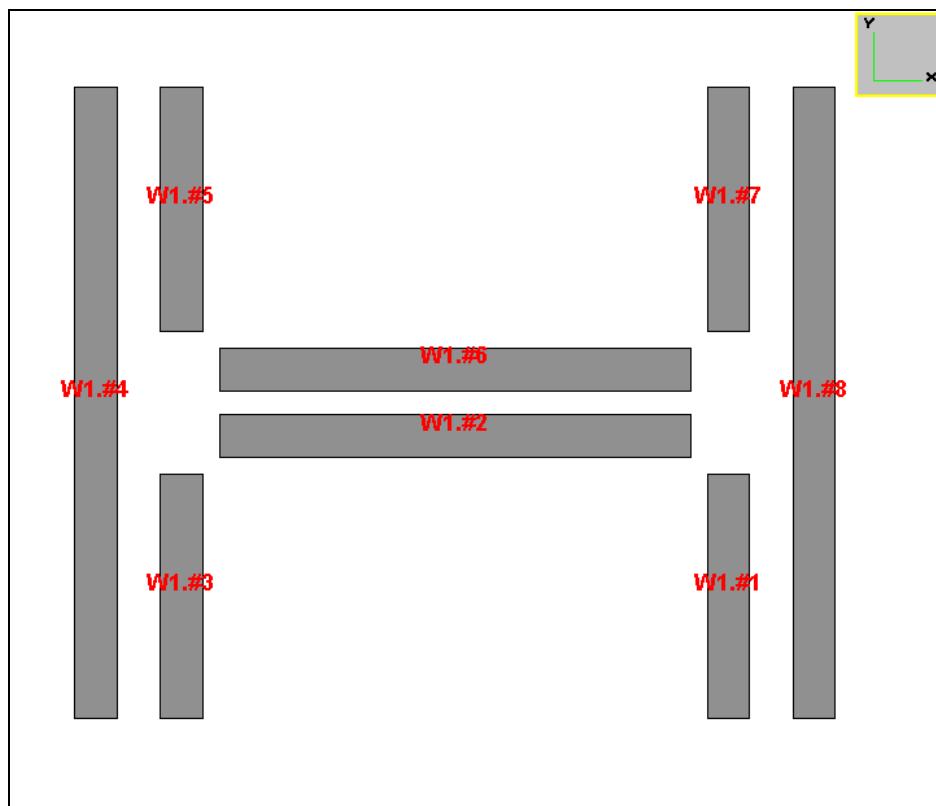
Upper weld layout (W1): fillet welds numbering
